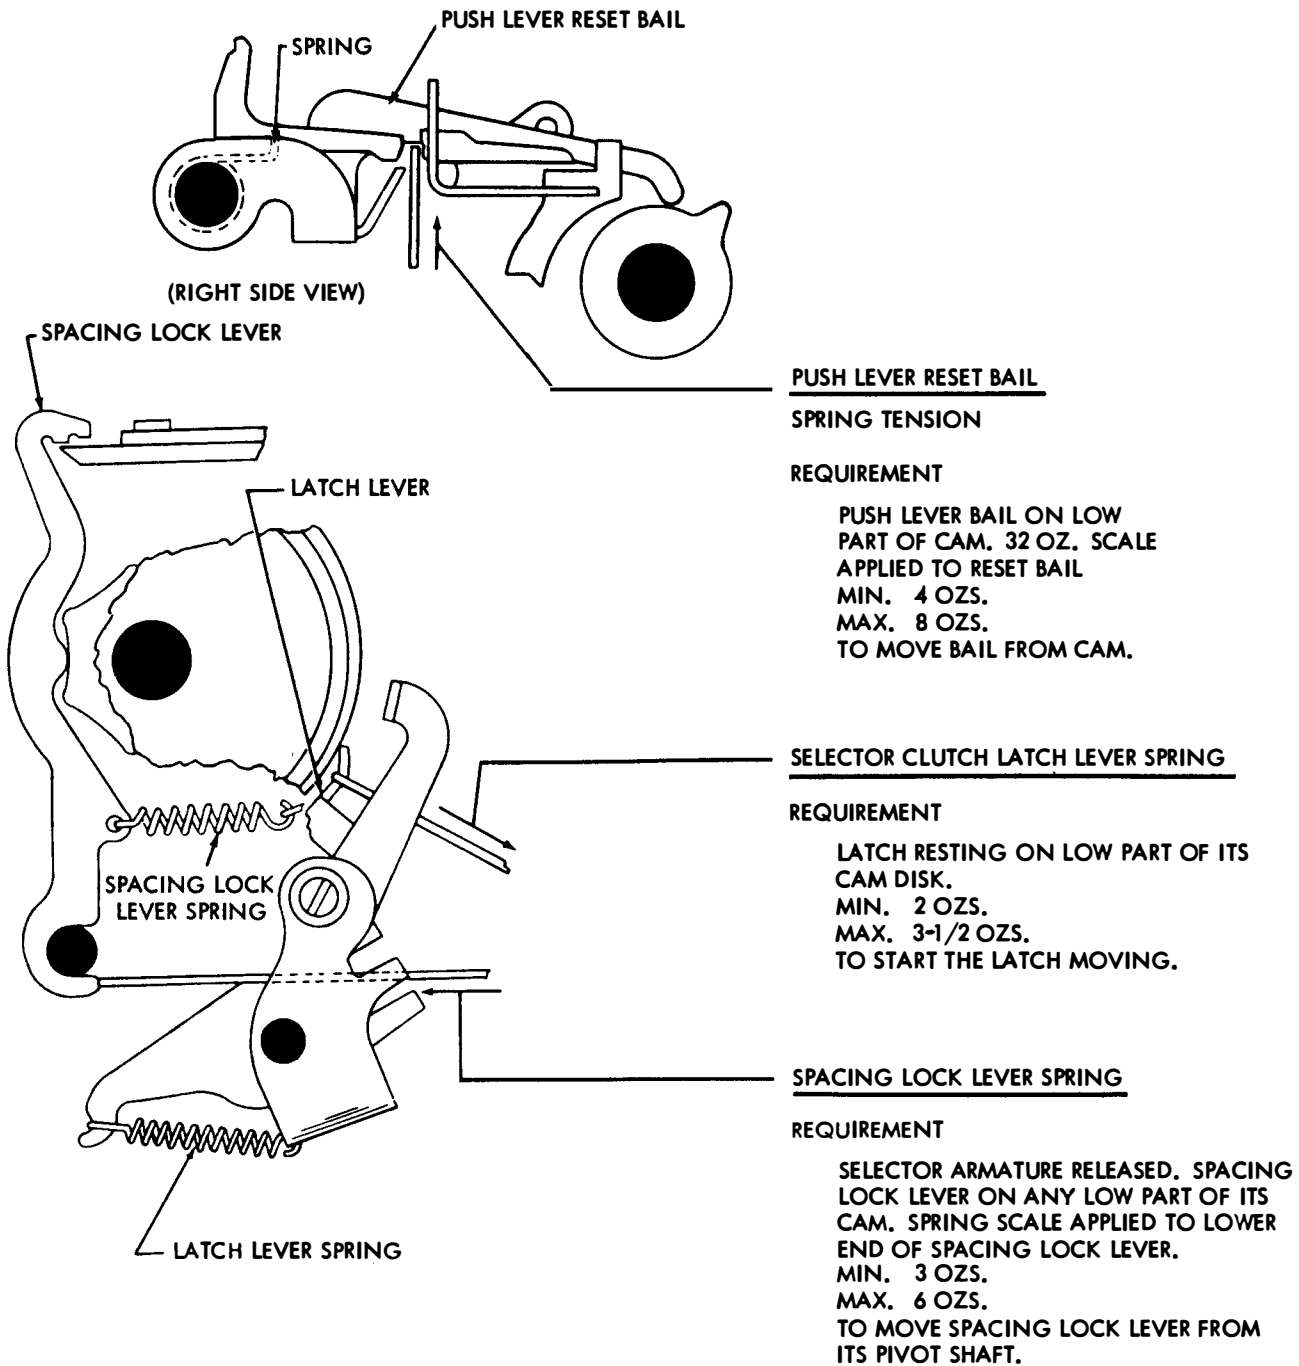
Automatic Typewriter, Selector Clutch Mechanism, Right Side View
